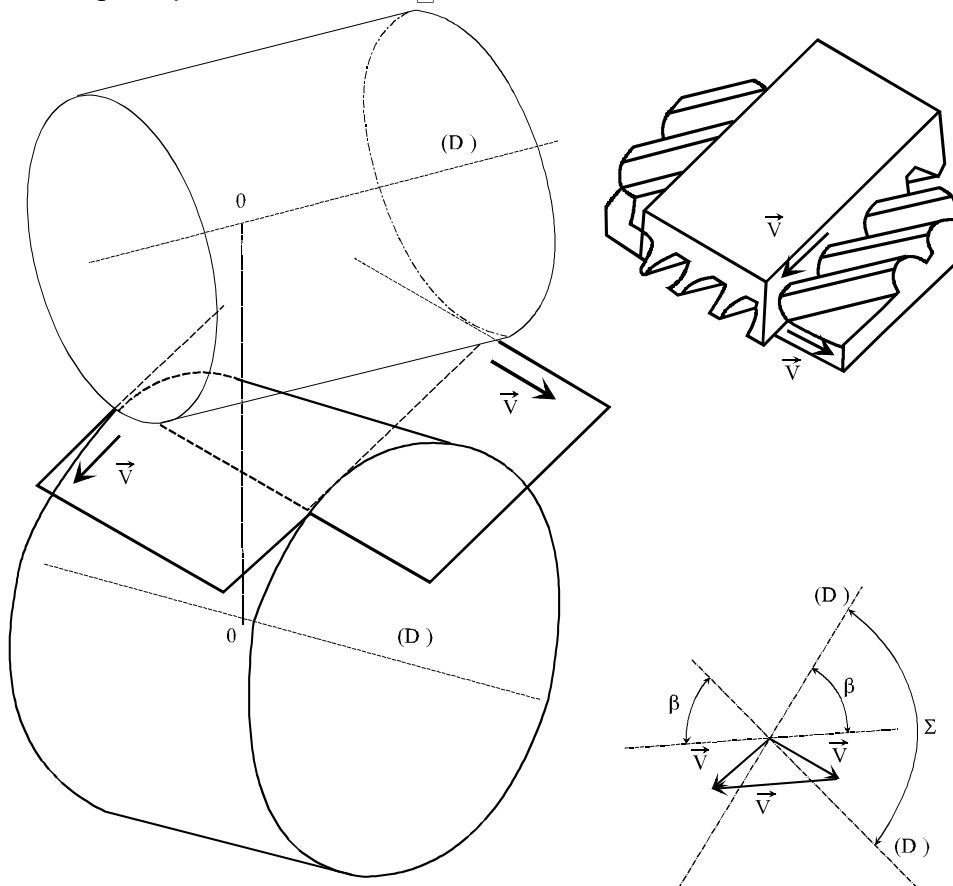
Gearing with crossed axes and gears equivalent to the gear rack cylindrical wheel
